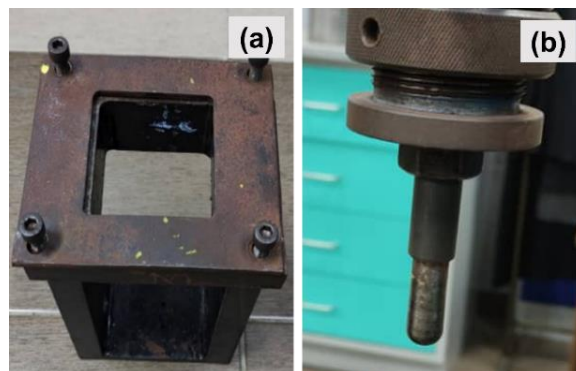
(a) Support fixture and (b) Hemispherical indenter
